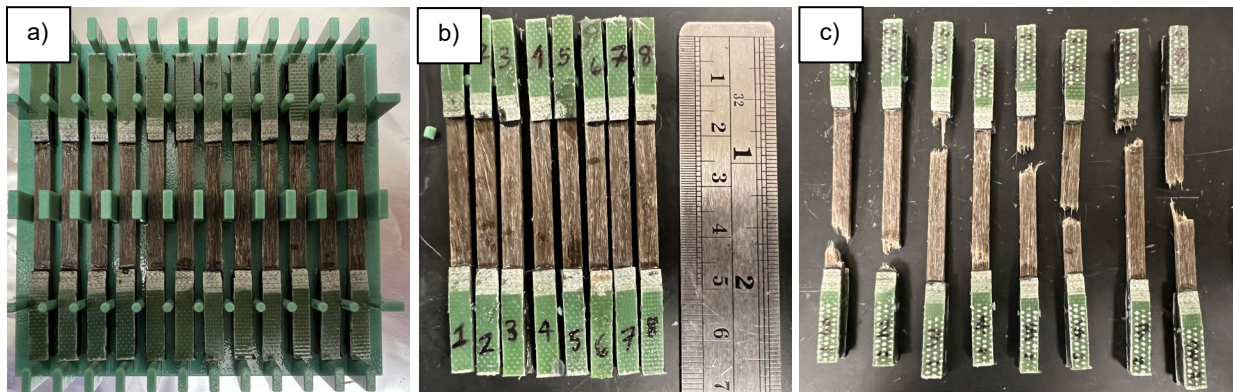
a) Fixture used to apply tabs to composite specimens, b) Composites ready for tensile testing. c) Composites after tensile testing showing failure within the specimen gauge length.
